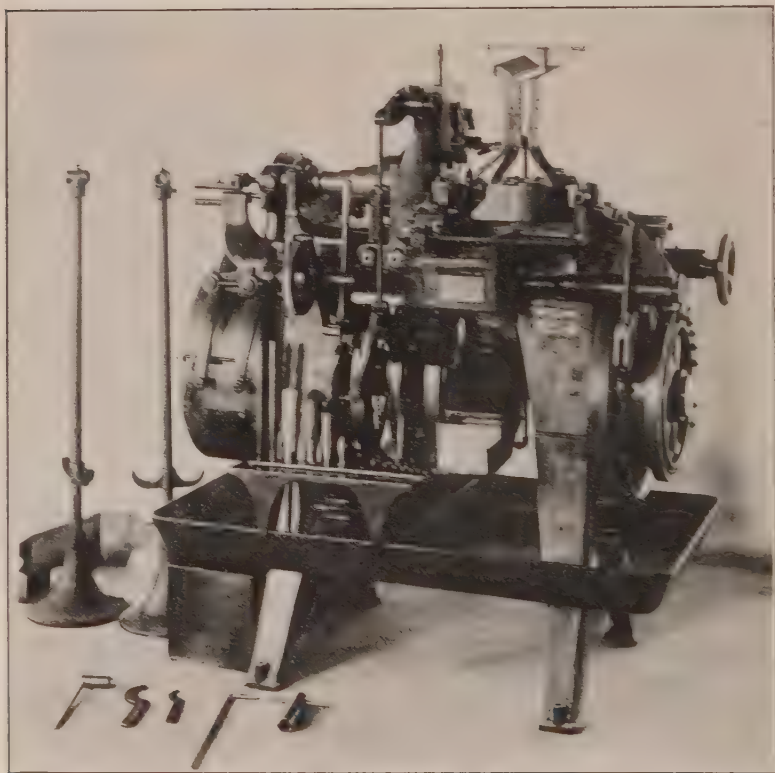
The Davenport Automatic Assembling Machine for Assembling and Finish-Turning Lantern Pinions for Clocks.
